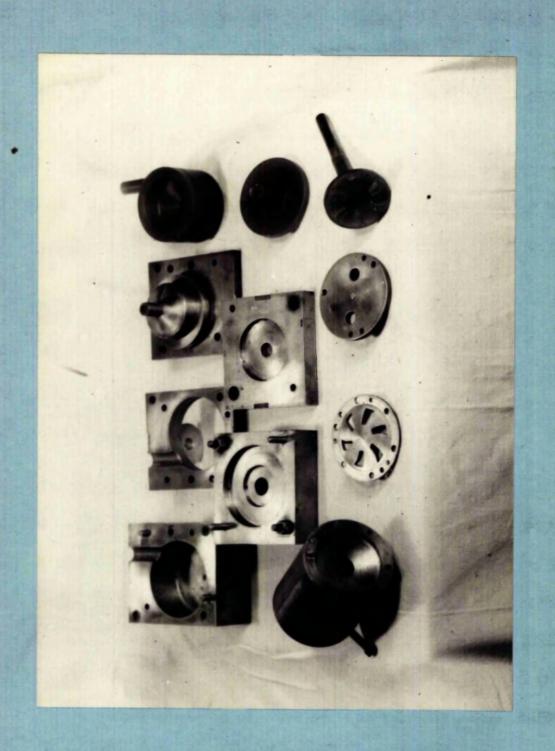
STEEL DIE-MOULDS AND POLYESTER RESIN PUMP COMPONENTS.
